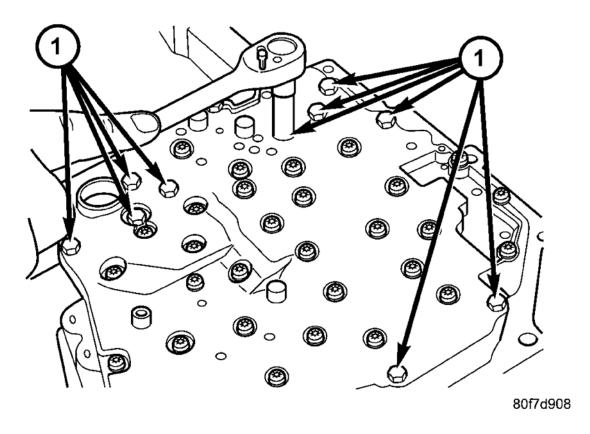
Removing/Installing Valve Body Bolts Courtesy of CHRYSLER LLC
